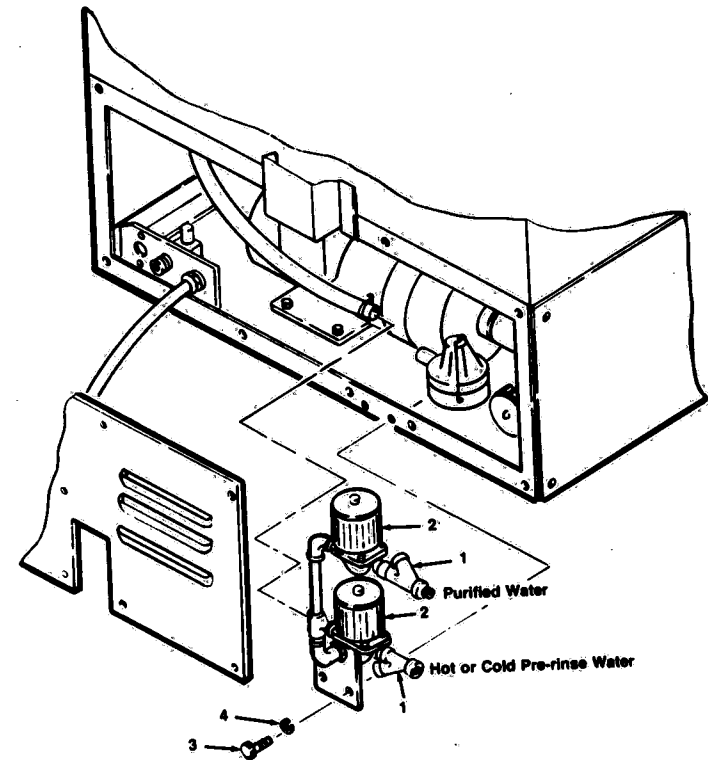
OPTIONAL NONCIRCULATING PURIFIED-WATER RINSE SOLENOID VALVE WITH PRE-RINSE SOLENOID VALVE.
